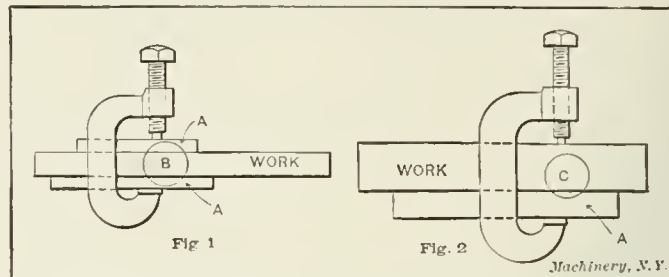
Method of Drilling a Hole which breaks through on Both Sides
